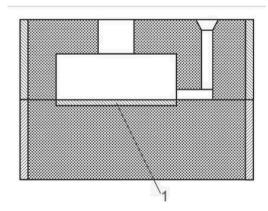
Cross-section of sand mould with plate of alloy steel (1) placed in its cavity
